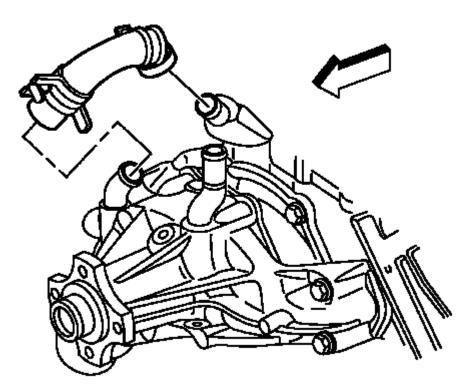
View Of Water Pump Inlet Hose & Clamps Courtesy of GENERAL MOTORS CORP.
